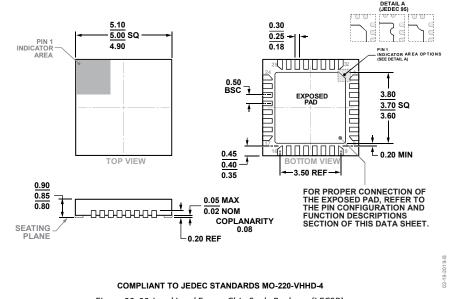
32-Lead Lead Frame Chip Scale Package [LFCSP] 5 mm × 5 mm and 0.85 mm Package Height (HCP-32-1)
